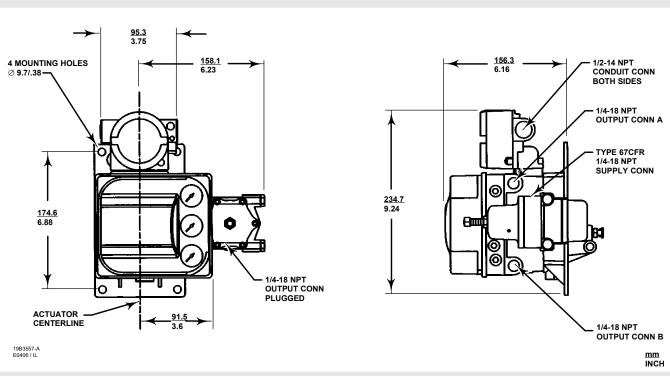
Dimensions for Type DVC6020 Digital Valve Controller with Integrally Mounted Filter Regulator
